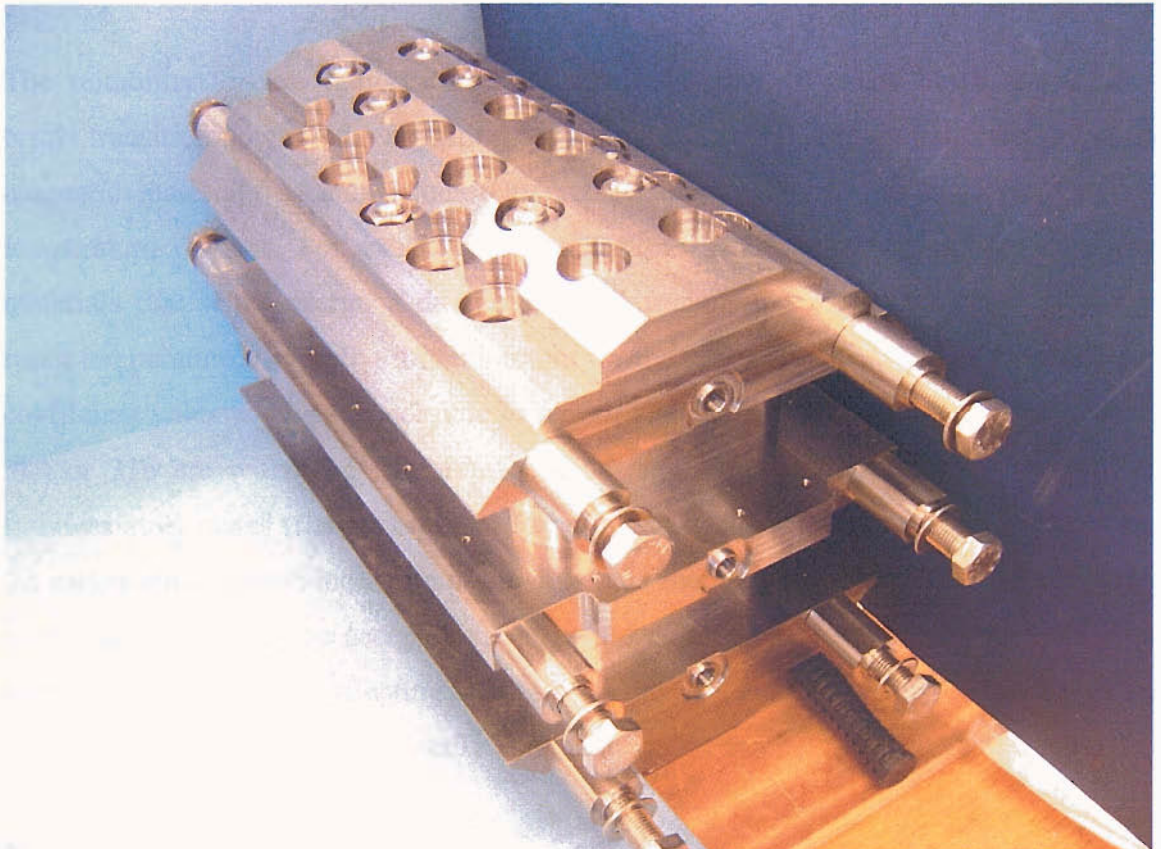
Partly assembled superconducting synchronous generator rotor core
